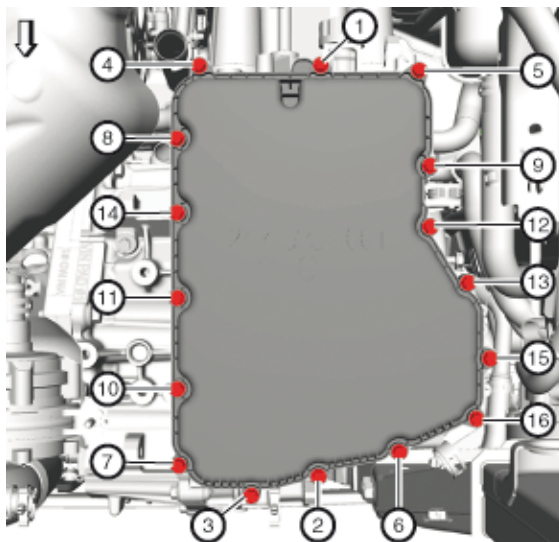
Control Valve Body Cover Bolts Tightening Sequence
